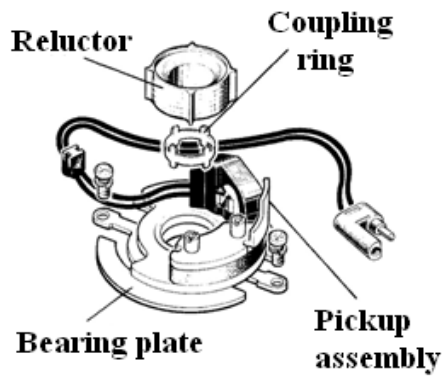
Distributor backplate with reluctor and pickup assembly exploded view
